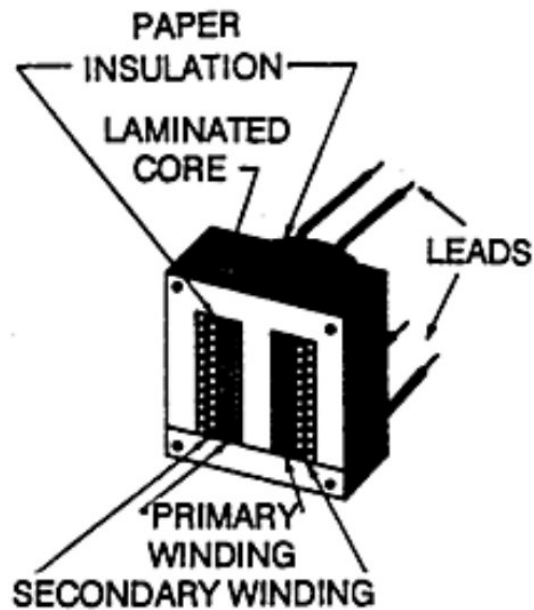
Cutaway View of Shell-Type Core With Windings.
